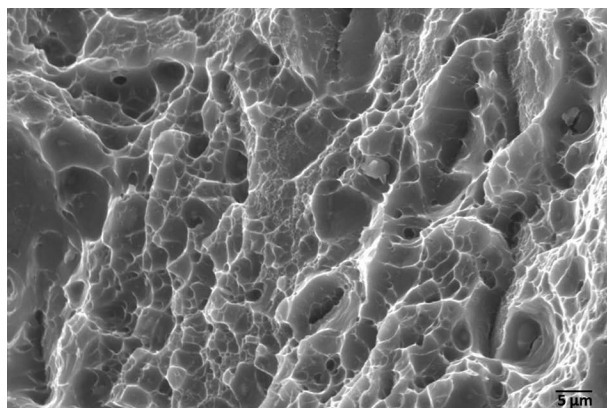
Higher magnified image of the fracture surface shown in Fig. 90. Note the entire fracture surface covered with dimples indicating ductile nature of failure
